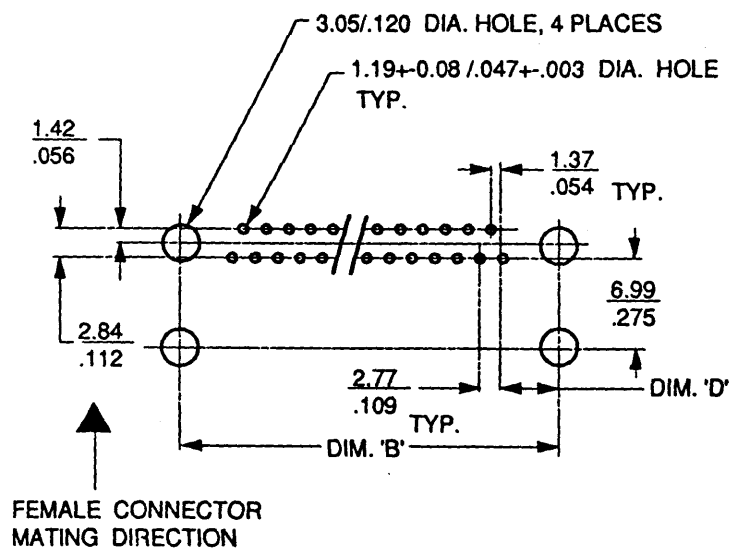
RECOMMENDED PCB MOUNTING LAYOUT
